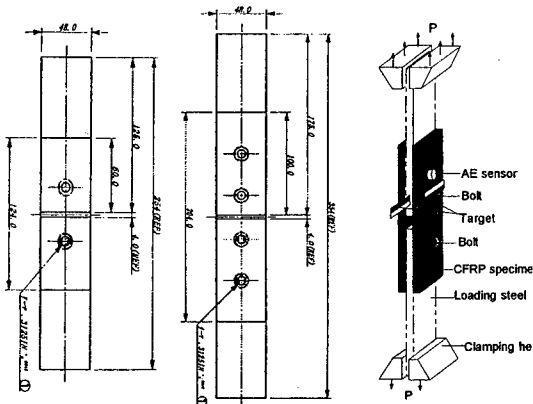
Geometrical configuration and testing setup of the specimen in bolted joints.
